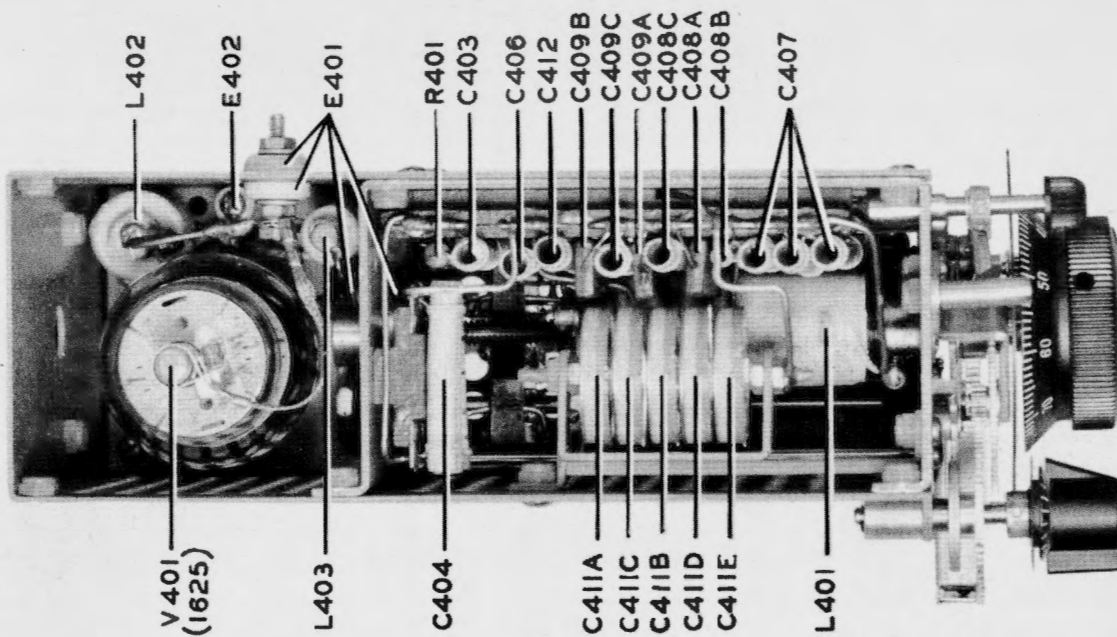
Low Frequency Oscillator Unit - Top Open View
